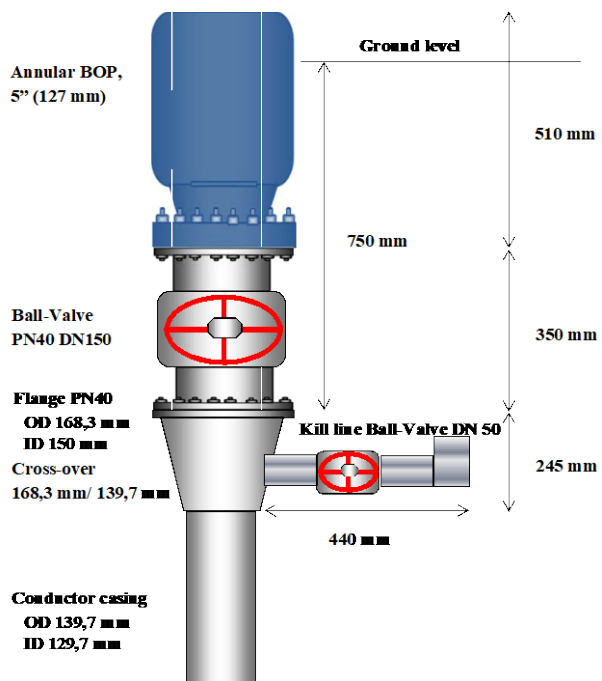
Sketch of the COSC-2 wellhead (similar to the one used at COSC-1). A 5" annular Blow Out Preventer (BOP) was attached on top of the main valve, a DN150 ball valve. A DN50 ball-valve was used for the kill line.
